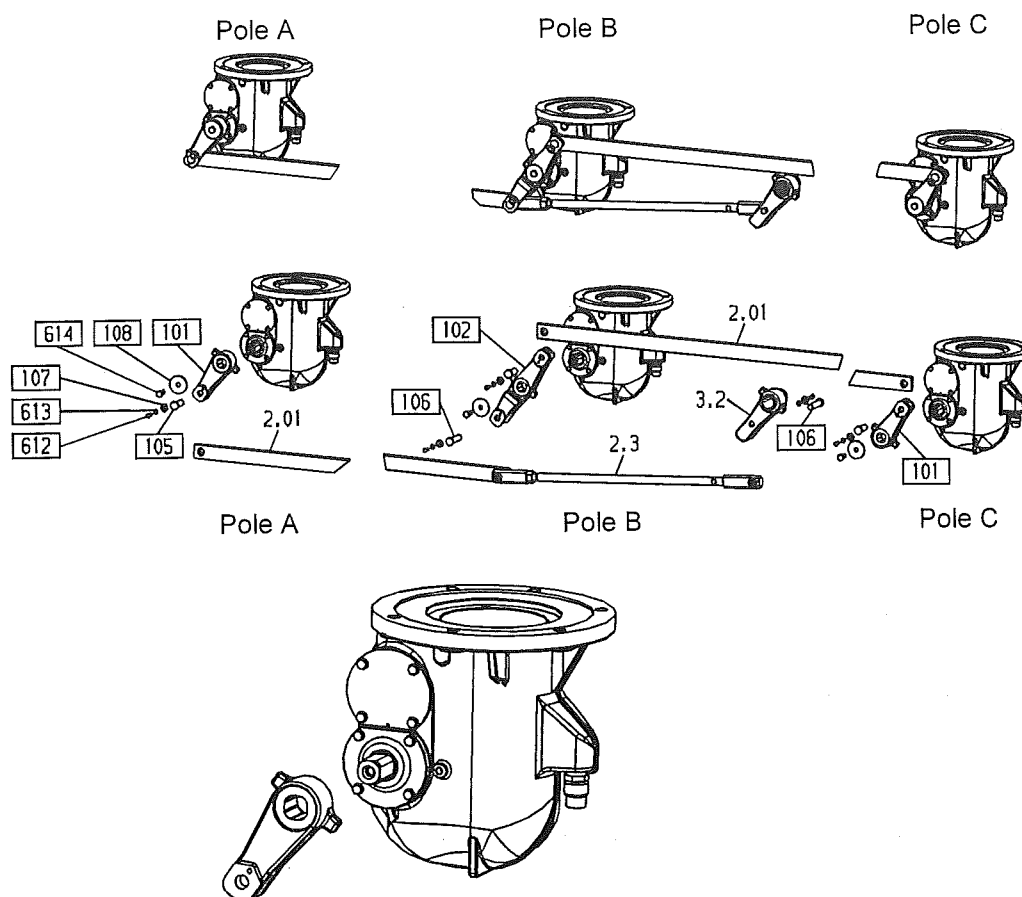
Mounting the drive rod and the connecting rods
